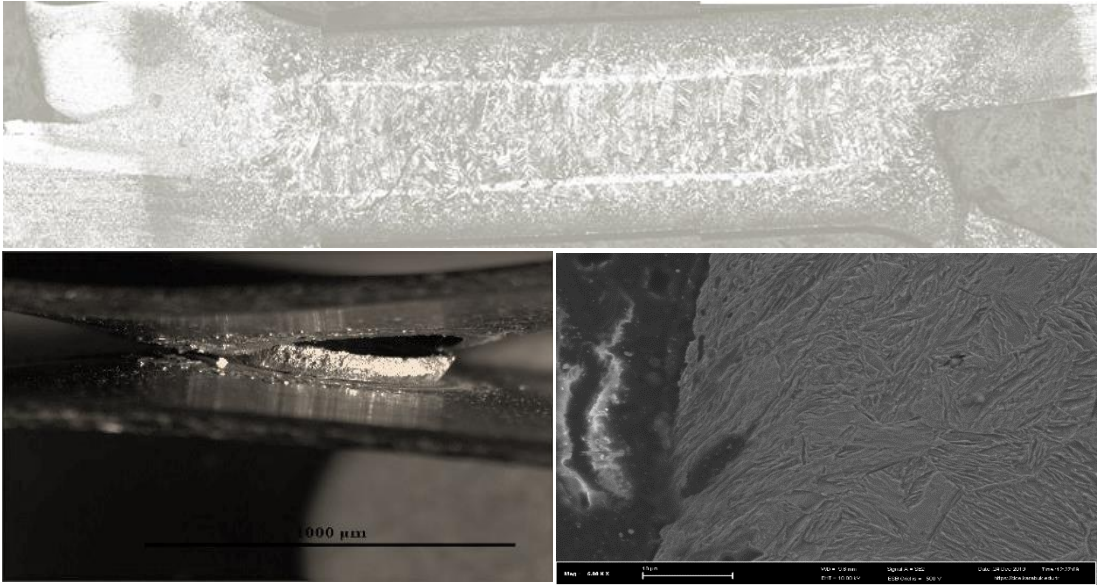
Failure mode pull out in resistance spot welding for HAZ.
